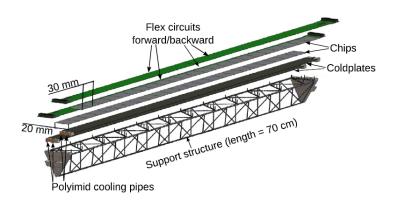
An exploding drawing of a fully assembled layer 5 ladder.
